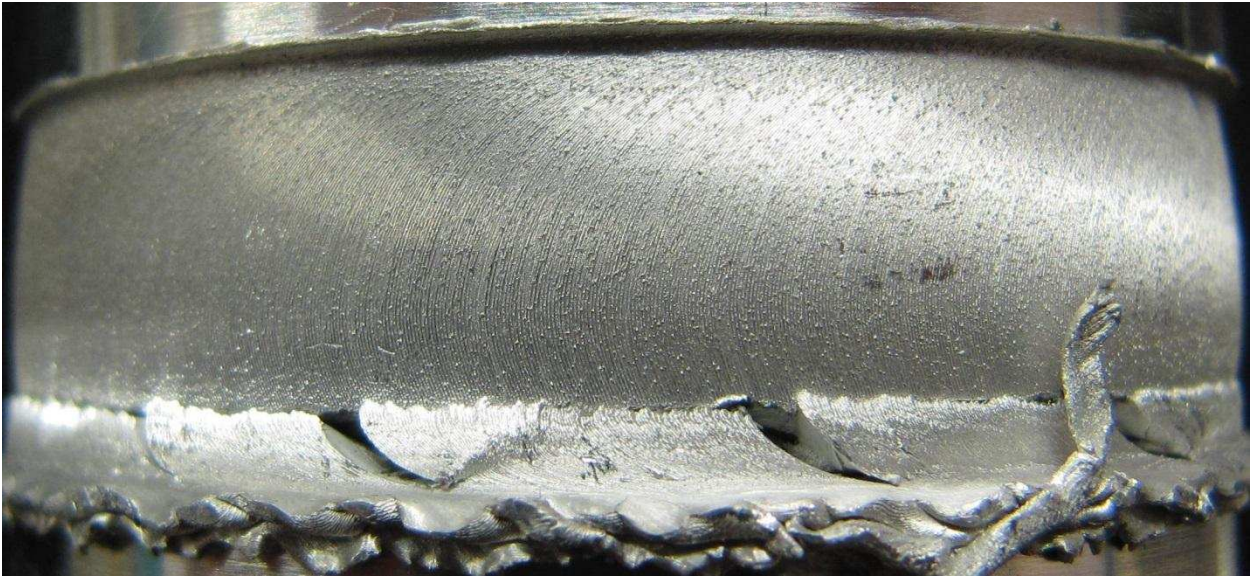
Multiple crack initiation sites observed in torsion fatigue at  $R = 0$ . This image shows specimen T23.
